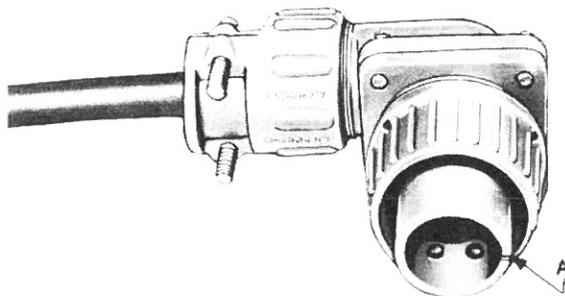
Elbow and Plug Body of Type AN-3108-16-11S Joined
